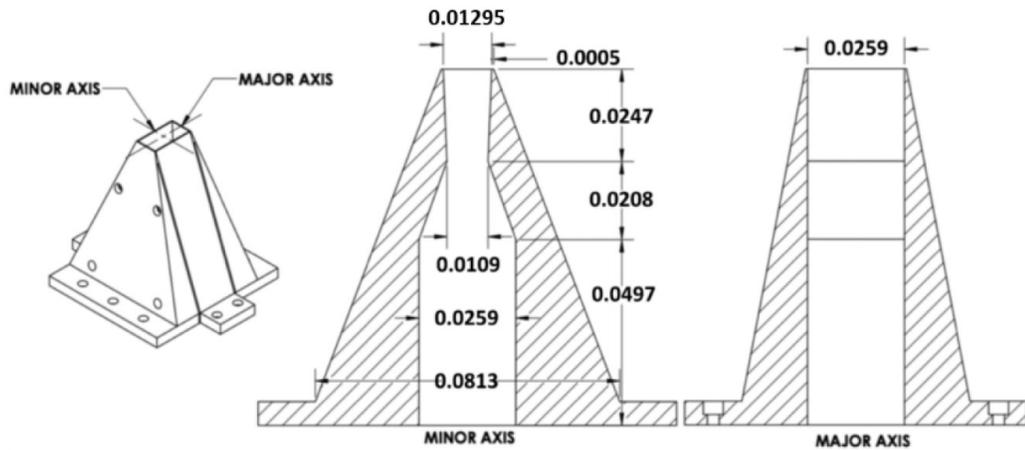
Nozzle geometry cross-sectional views (dimensions in meters) (Mora et al., 2016).
